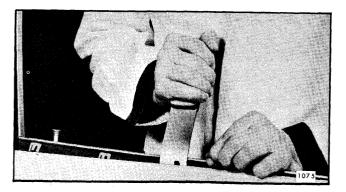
Glass Run Channel Inner - Outer Strip Assembly Removal - "A-X & Z" Styles
